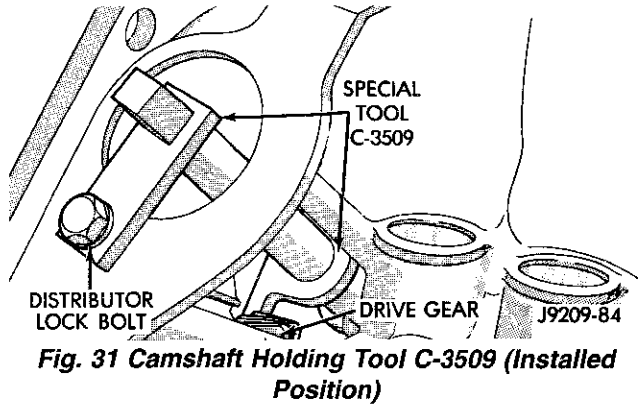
Camshaft Holding Tool C-3509 (Installed Position)
